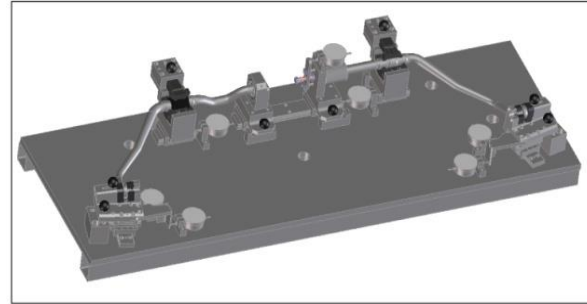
Cold bending machine for car stabilizer (source *TKBS*)
